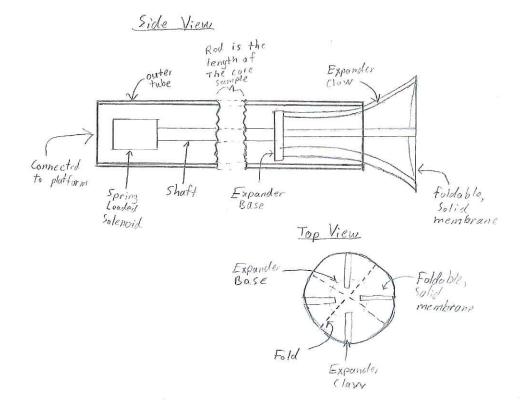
The rod to remove the core sample from the hollow shaft. The membrane and claws will shrink in diameter as the rod shaft is brought towards the rear of the rod by the solenoid.
